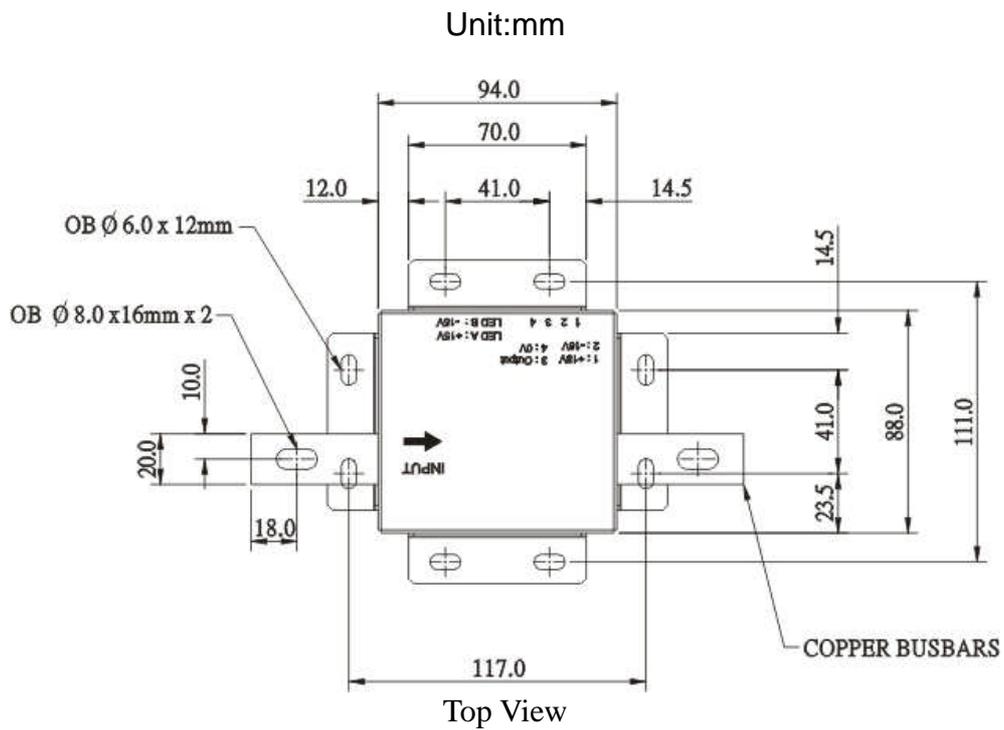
Hall CT Kit (HCT) 50 ~ 600A Dimension Drawings
